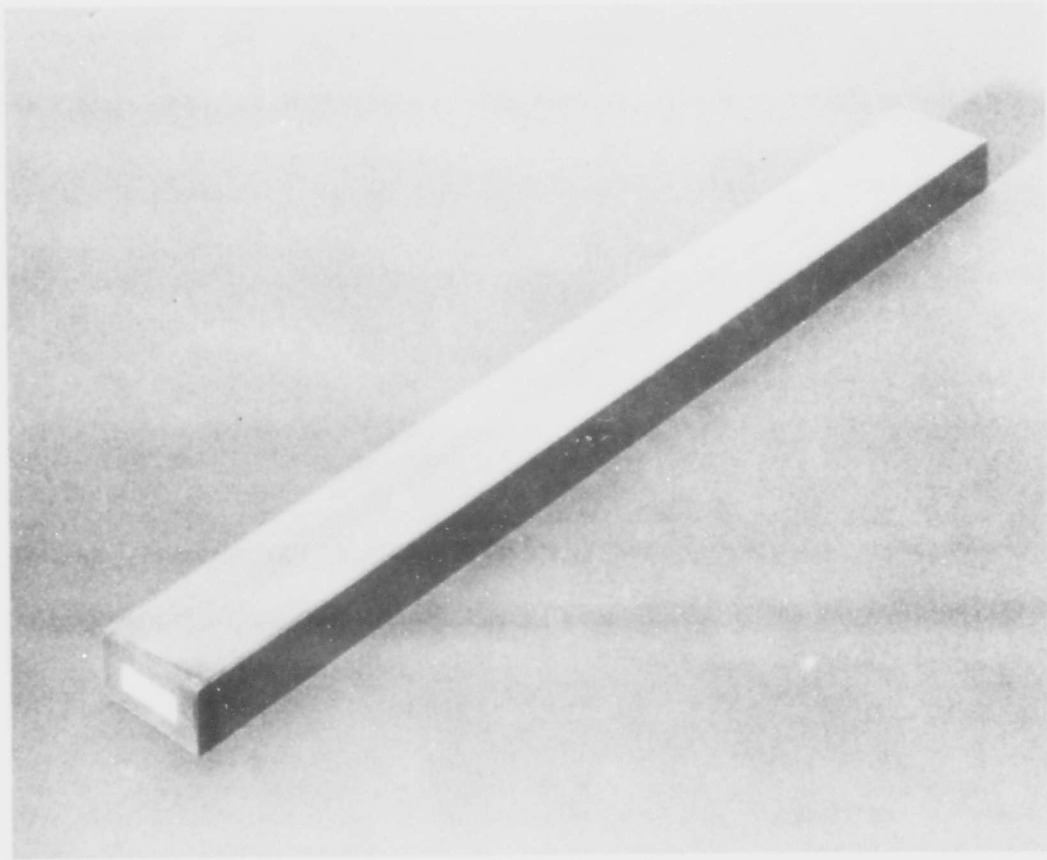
Electron beam welded molybdenum waveguide with mullite window.
